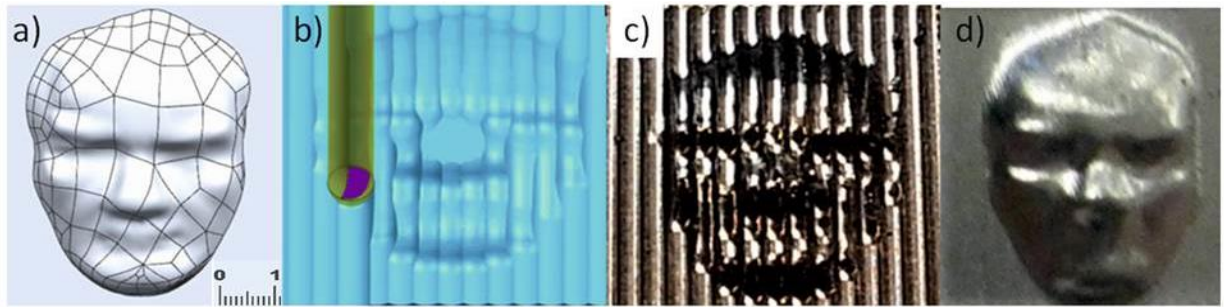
a) CAD model of freeform surface, b) CAM simulation and tool workpiece contact region, c) Machined part after roughing, d) Machined part after finishing
